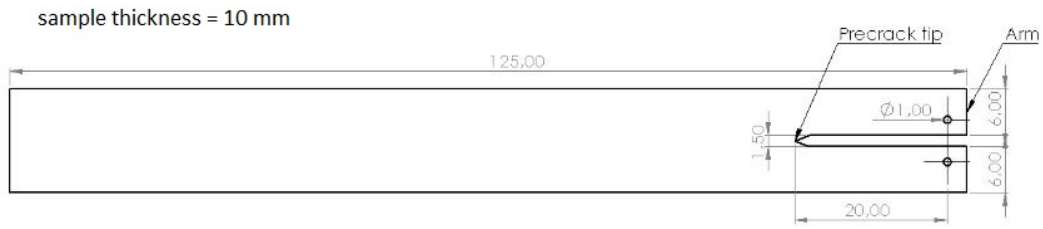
Dimensions of DCB test samples used, based on ASTM D5528-01 [15] and the work previously done by Aliheidari [12] (all dimensions in mm).
